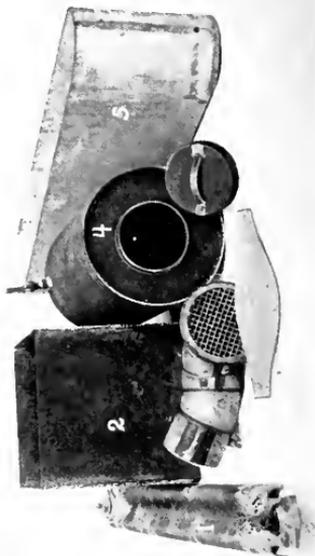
Miscellaneous Sheet Metal Parts on which Electric Welding is Employed
